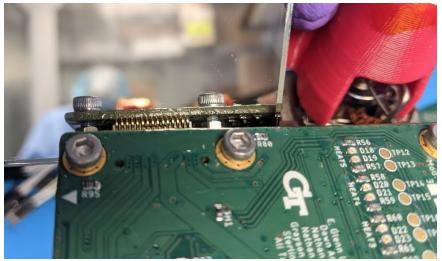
Mirror Inspection of Controller Board Connector Pins
